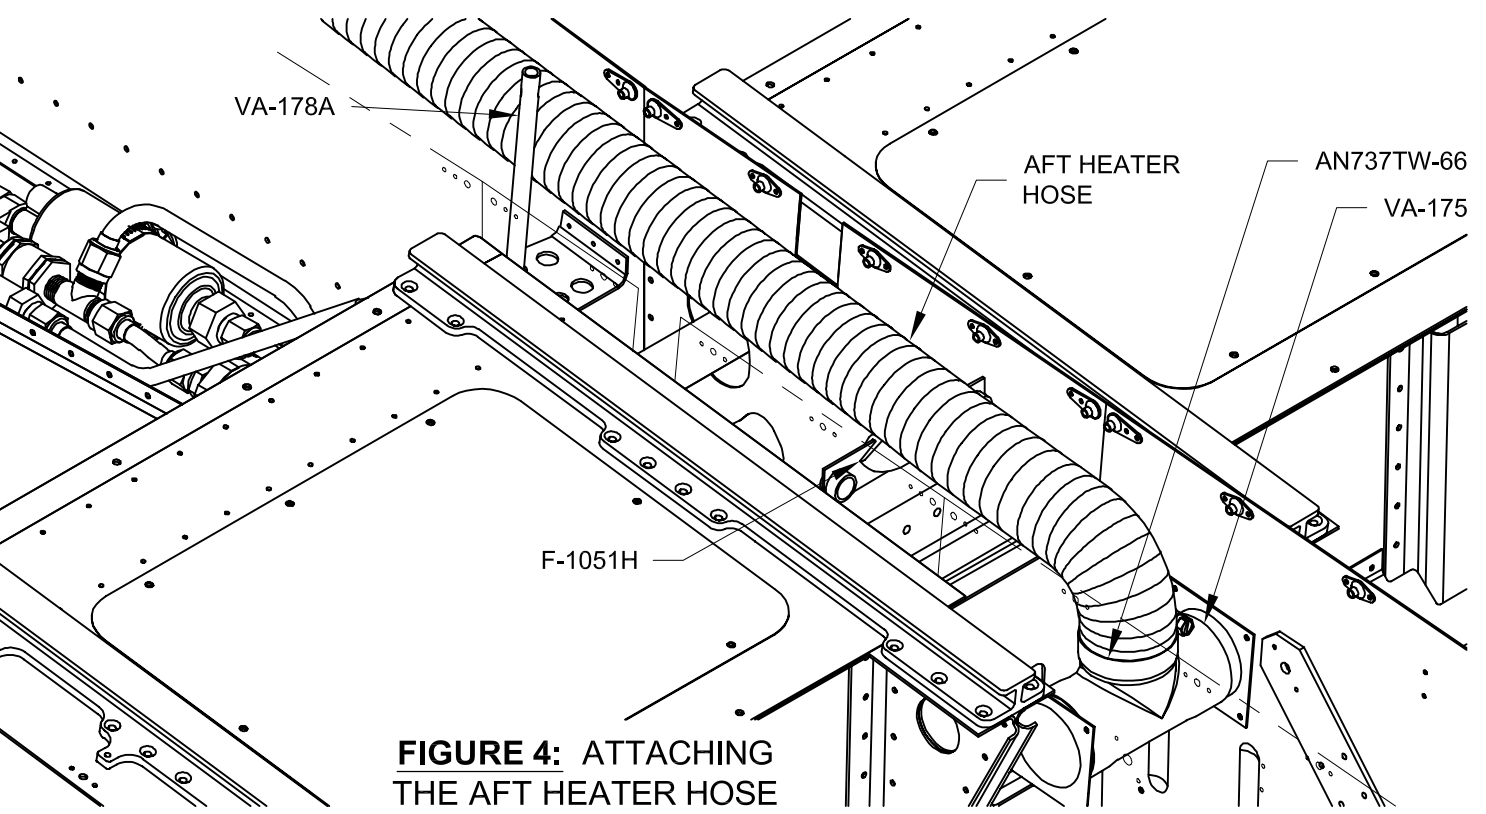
ATTACHING THE AFT HEATER HOSE
